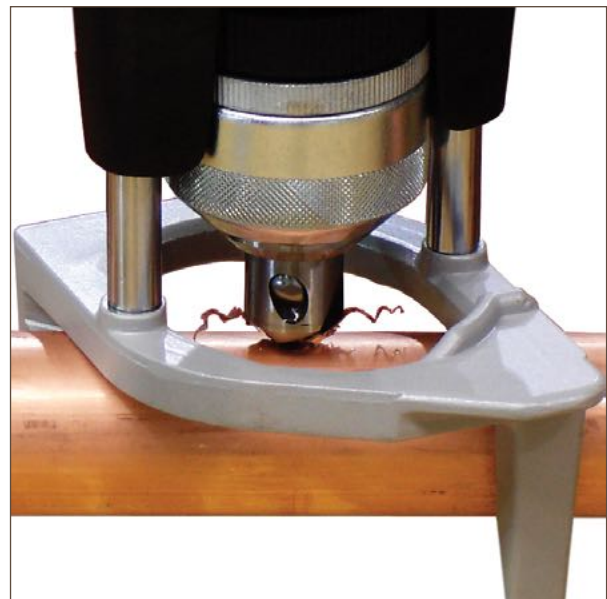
Positioning the drill tip and ensure a snug fit of the support legs
